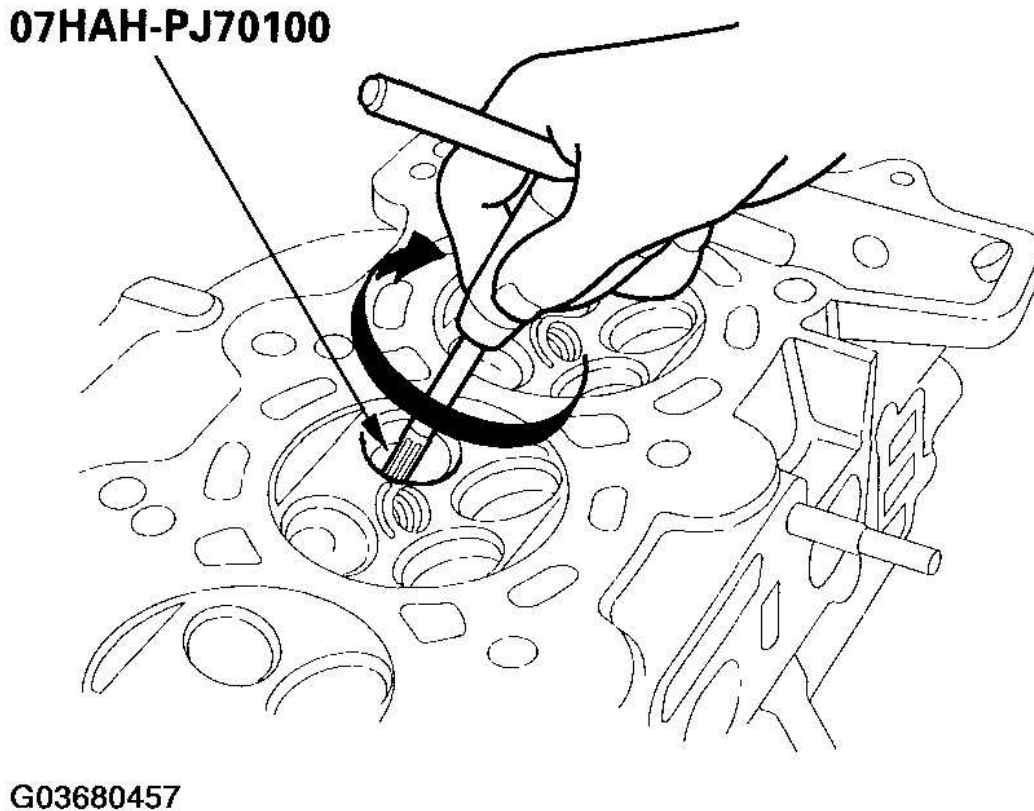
Rotating Reamer Clockwise Full Length Of Valve Guide Bore
